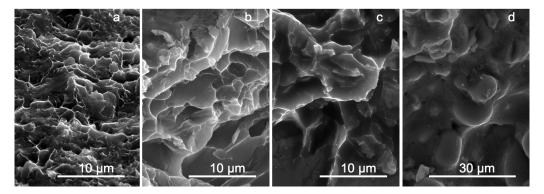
SEM micrographs of the fracture surfaces in bending fatigue tests: (a) and (b) for alloy 1, and (c) for alloy 4, after processing by pressure die casting, in samples showing decohesion facets at former Si particles; and (d), in alloy 4, after processing by atmospheric die casting, on a sample showing a fracture facet at a microshrinkage.
